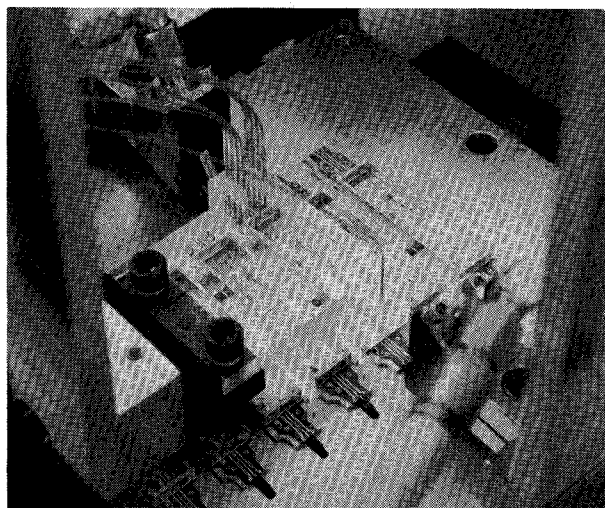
Package design should be compatible with automated assembly and test in a common carrier fixture if low-cost design objectives are to be met.
